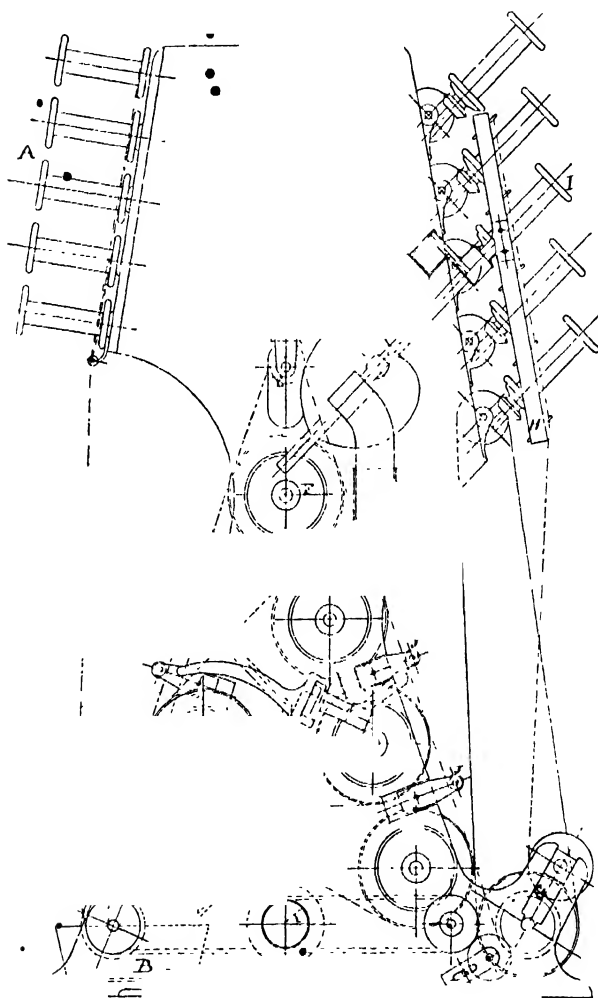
Bobbin-to-bobbin thread polishing machine.
